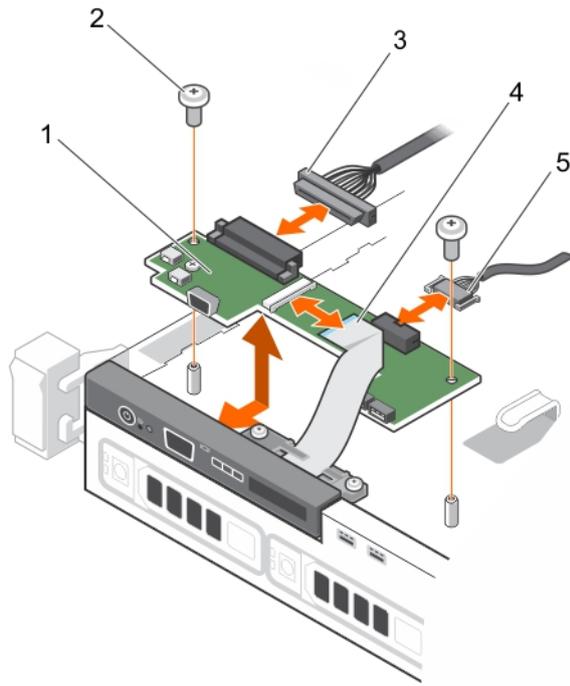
Removing and installing the control panel module—four hard-drive chassis
